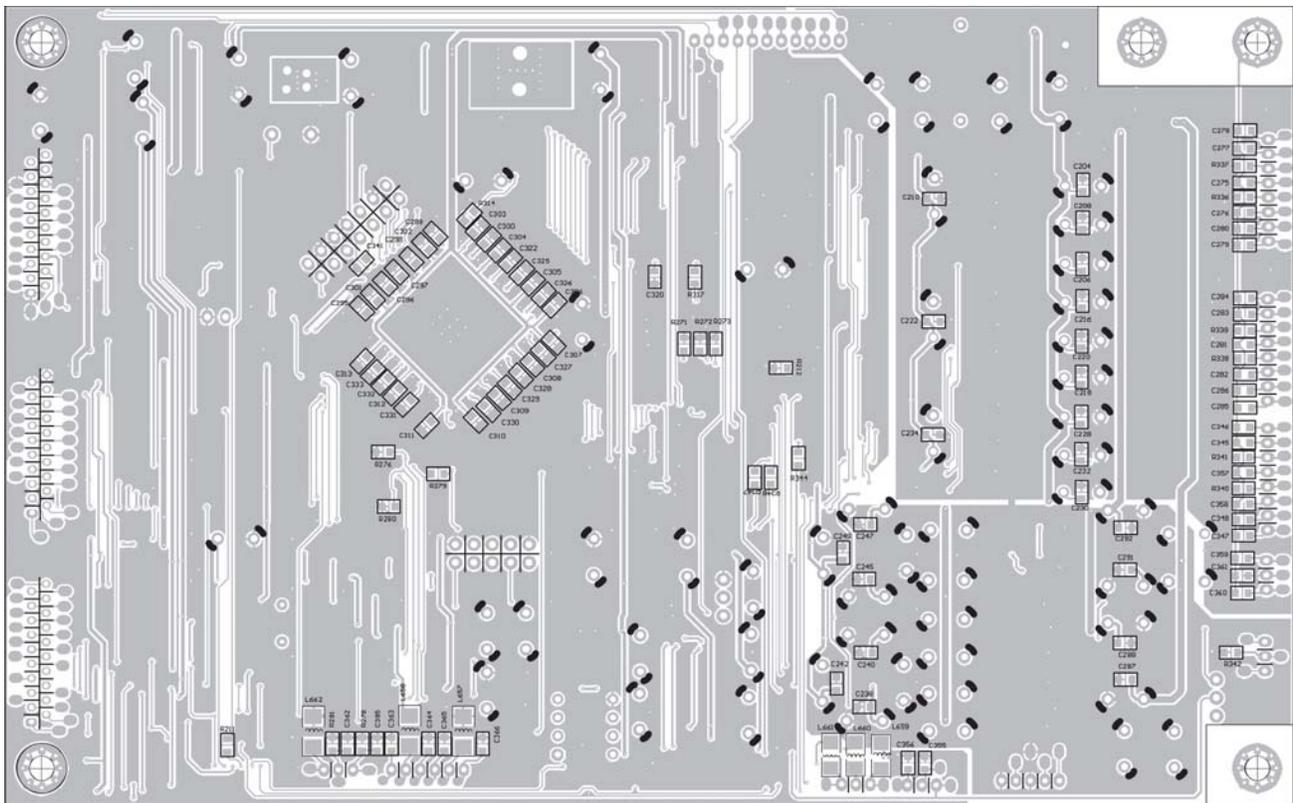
DSP and MCU PCB Bottomside Etch Layout
